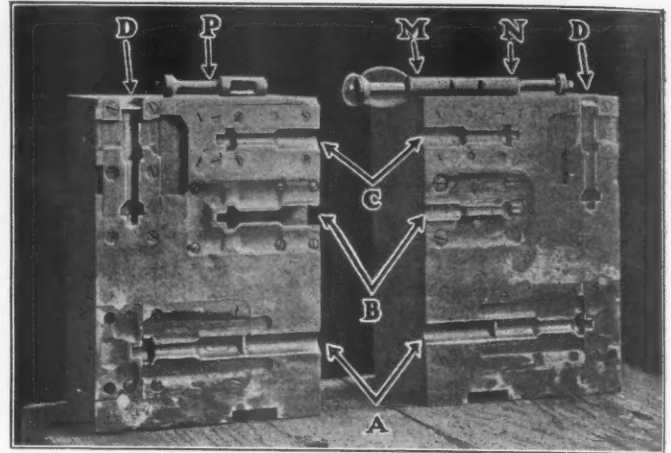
Dies Used in Forging Cylinder Cock Valves
